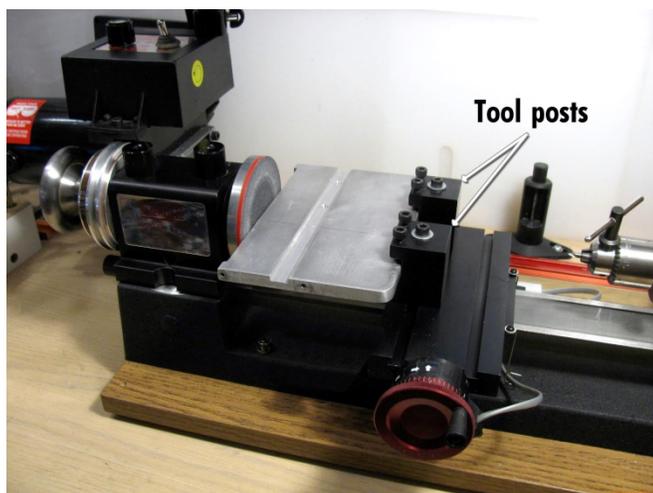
Shows a general 3/4 view showing the dual tool posts (P/N 40180) mounted on the crossslide and 1/4 in. cast aluminum plate, alternatively, a steel plate could be used.
